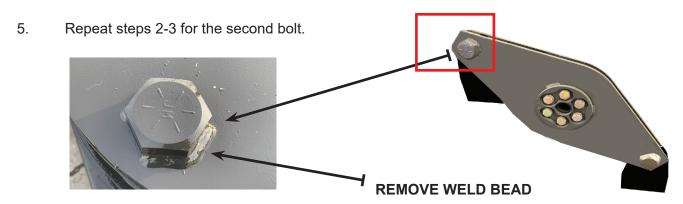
Blade Holder Bolt Weld Bead Removal
